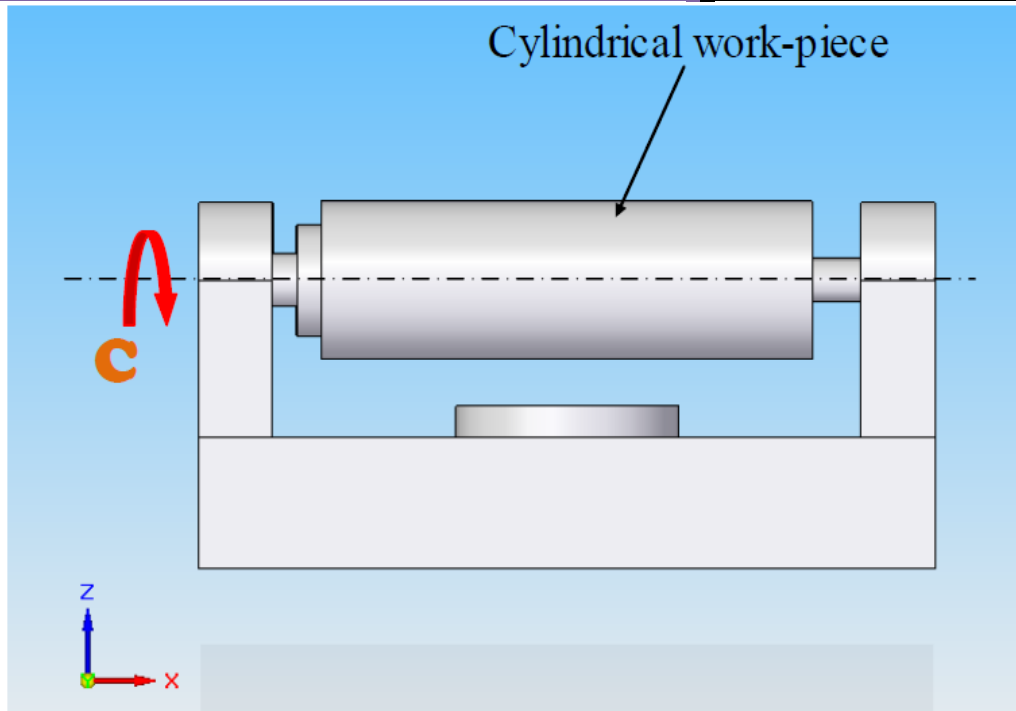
(b): Table rotates at 360° in Horizontal axis (C-axis) with cylindrical component holding.
